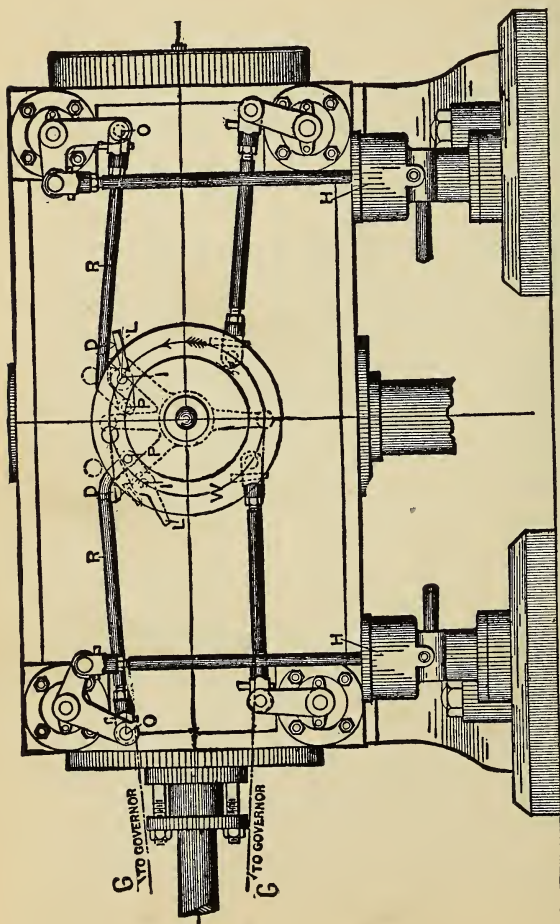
View of Corliss engine cylinder showing the valve gear. W is wrist plate which gives motion to both steam and exhaust valves. R R are valve rods which operate the steam valves. L L are connecting links and are supported by steel pins II securely fastened in wrist plate. P are small steel wrist pins connecting valve rods R R with links L L. D D are tripping arms moving in and from each other, varying the point of cut off to suit load. They are actuated by governor through rods G G. H H are dash pots which quickly close the steam valves as soon as released at wrist plate.
